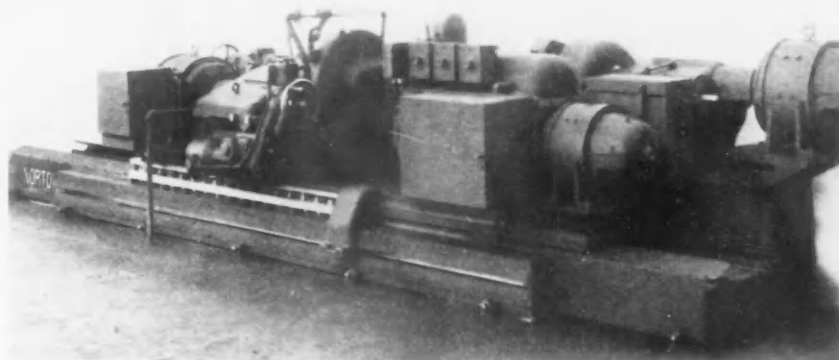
Traversing wheel-base roll grinder using the adjustable bar "former" for crowning.
